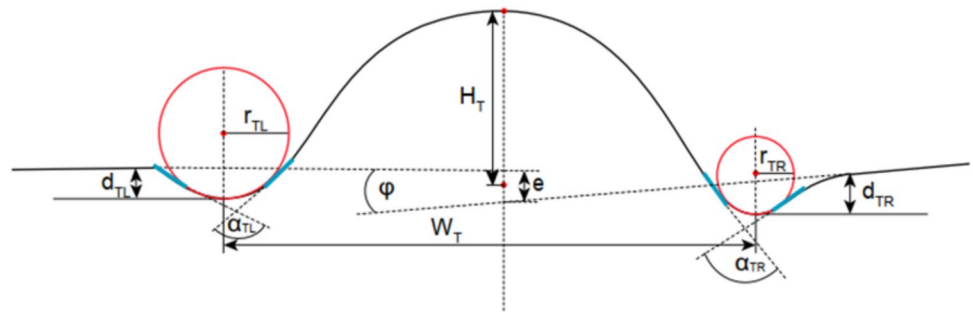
Schematic representation of the top side geometry of butt-welded joints, adopted from Braun et al. [8]
